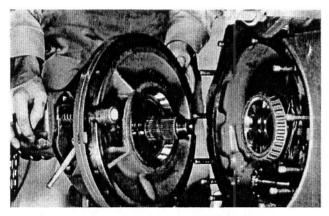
R.H. AXLE HOUSING ASSEMBLY REMOVAL OR INSTALLATION
